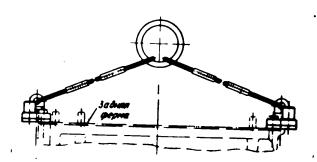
Compressor Rotor Impeller Installed in the Casing for Measurement of Total Clearance
